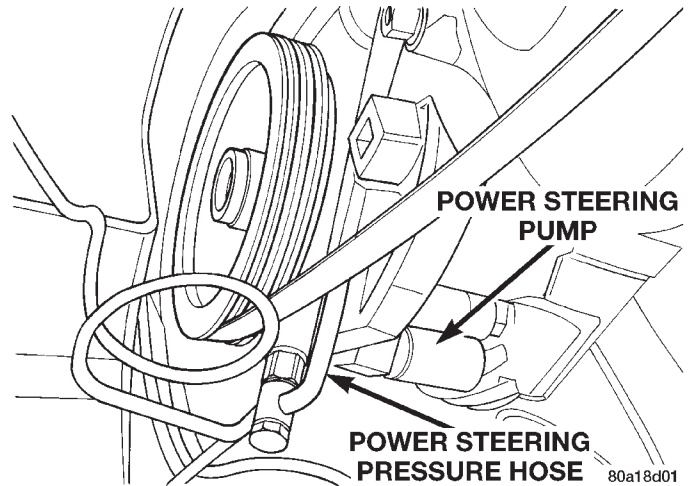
Power Steering Fluid Pressure Hose Attachment To Pump
